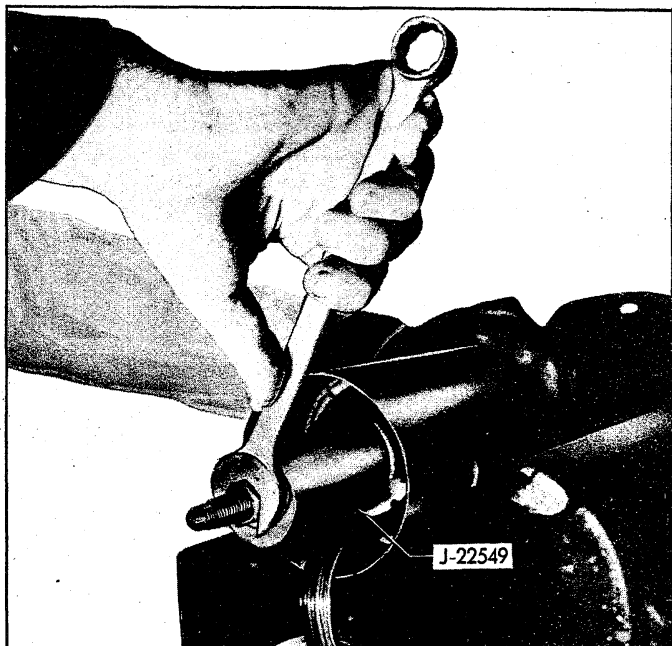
Installing Shift Tube Using Shift Tube Installer Tool J-22549
